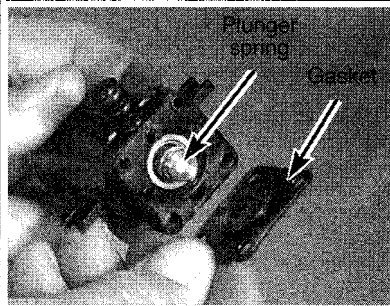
Remove the cover, gasket, plunger spring, plunger valve
